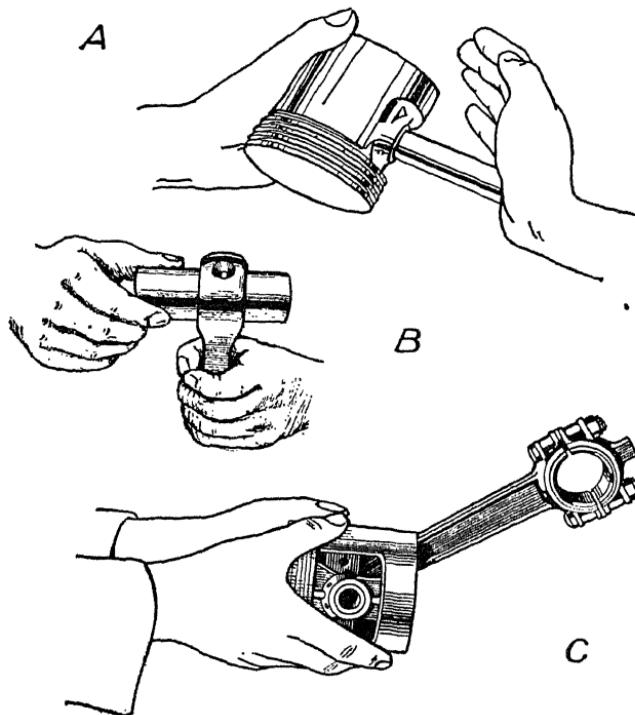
A—Pushing Piston Pin into Newly Reamed Piston
